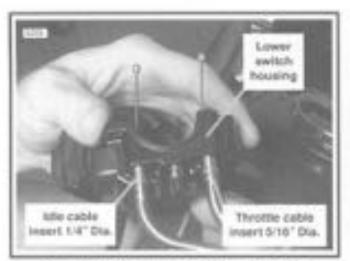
Install Throttle/litle Control Cables in Lower Switch Housing
